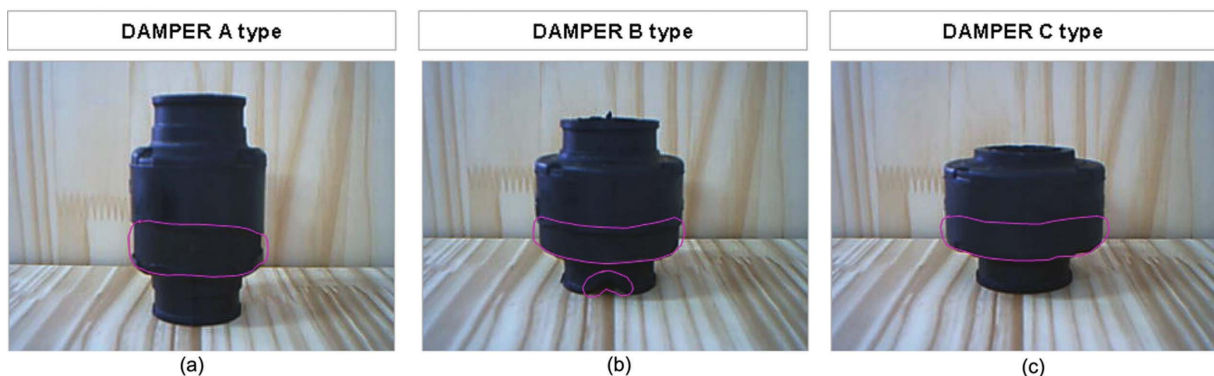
Dynamic dampers produced by K company with the defect of short shot marked with red circle: (a) Damper A type; (b) Damper B type; (c) Damper C type.
